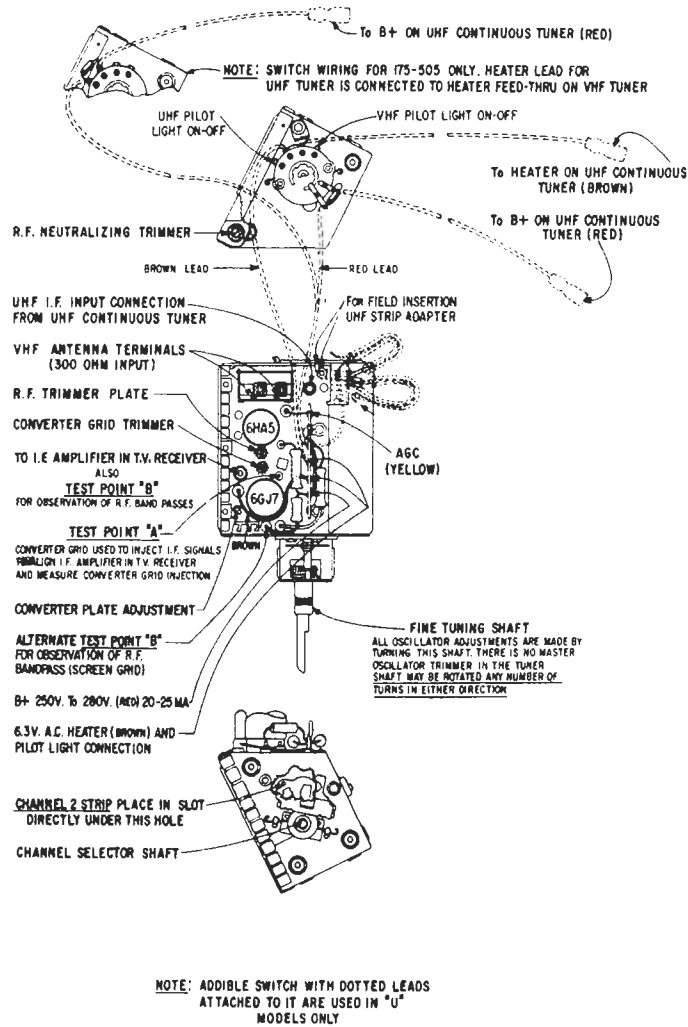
Tube and Trimmer Location, Super Gold Video Guard Tuner
